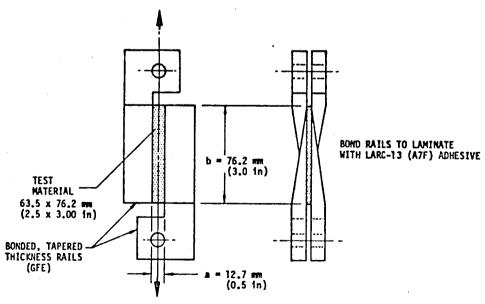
J: BONDED RAIL SHEAR SPECIMEN
